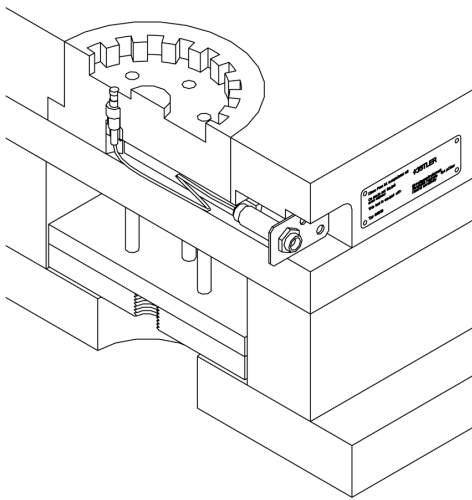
Sensor, cable, mounting plate (Art. No. 3.520.328) and identification label (Art. No. 3.520.842)
